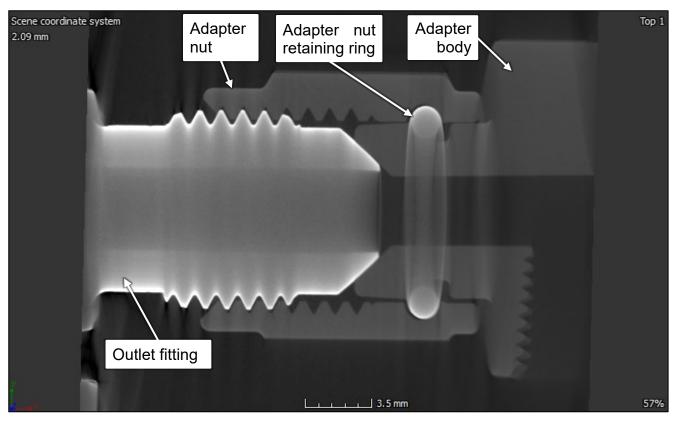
Cross-sectional image of the connection between the outlet fitting and the fuel pressure adapter fitting from an x-ray CT scan of the assembled fittings.
